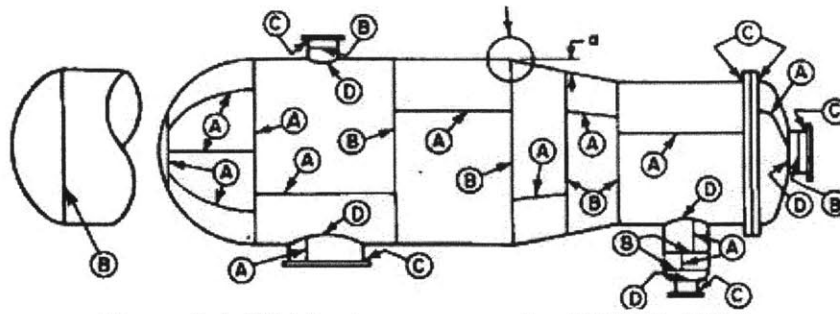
Weld category examples [ASME, 2007]
